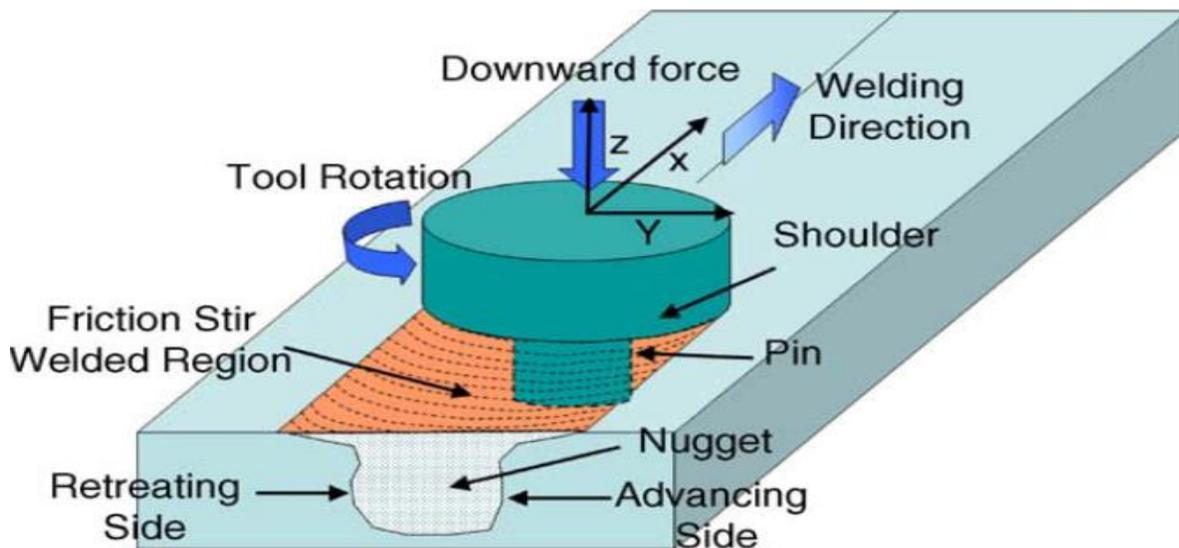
Schematic of friction stir welding.(Mishra and Ma 2005)
